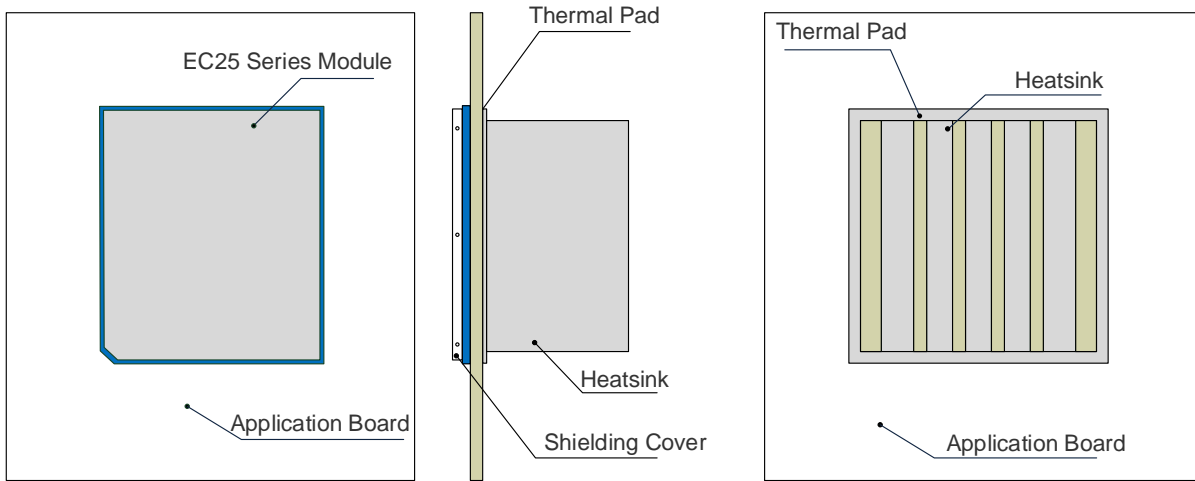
Referenced Heatsink Design (Heatsink at the Backside of Customers' PCB)
